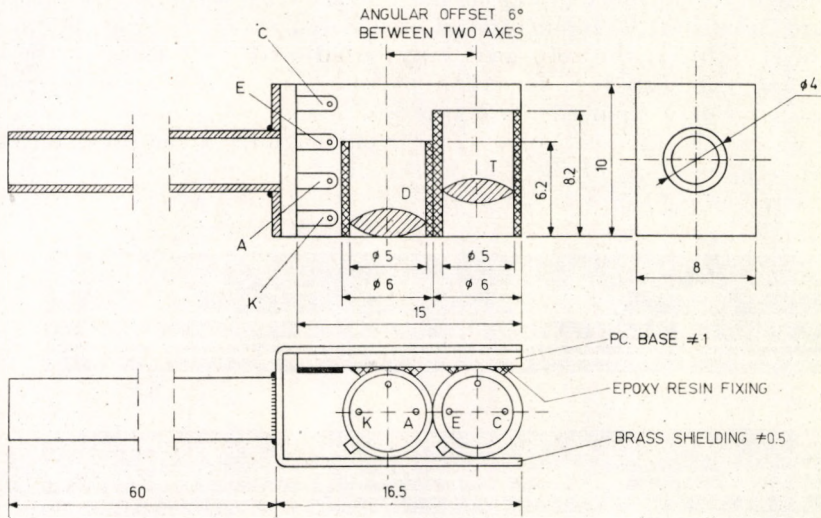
Layout of the movement indicator sensing head, with principle dimensional outlines
